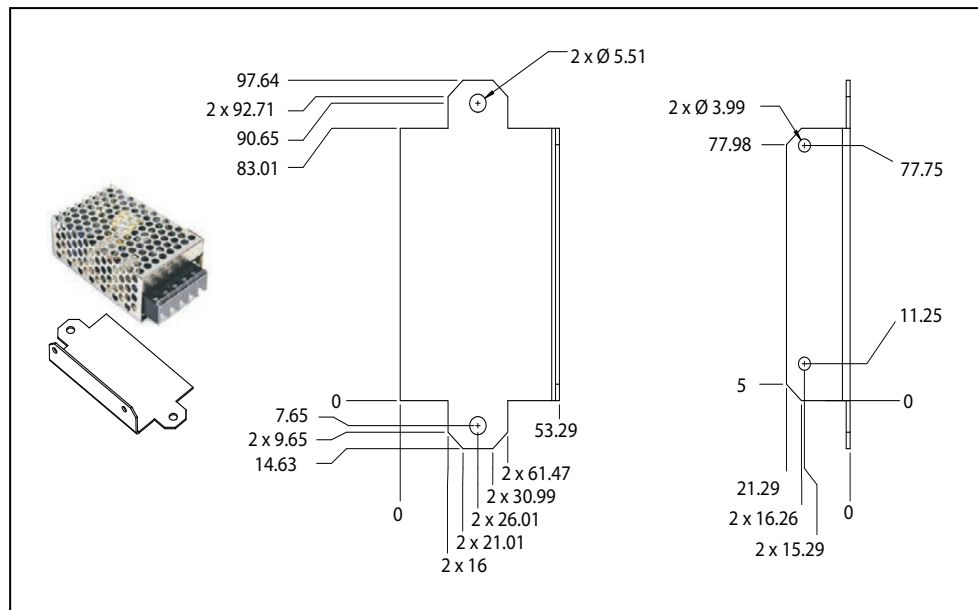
Power Supply Mounting Bracket Dimensions (units are mm)
